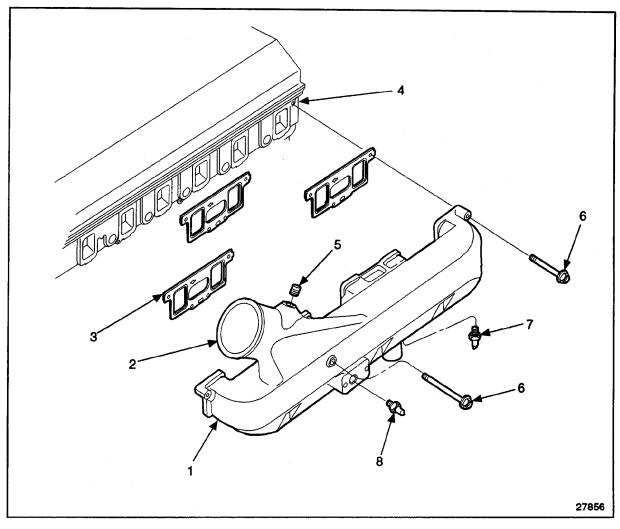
Intake Manifold and Related Parts — Heat Exchanger-Cooled Pleasure Craft Marine Engine
